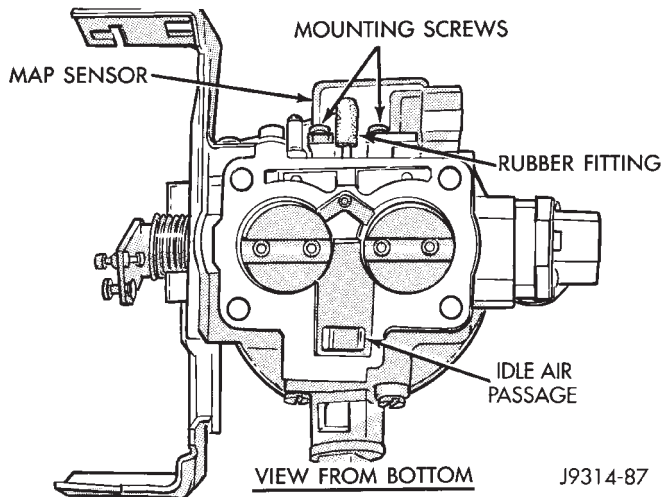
Rubber L-Shaped Fitting—MAP Sensor-to-Throttle Body
